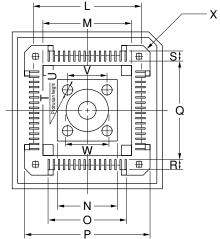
TGK-064SBW Package Drawing (For Reference Only)
